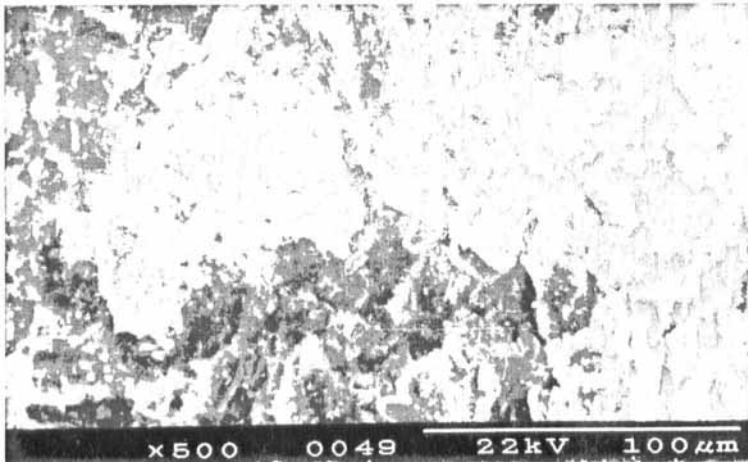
SEM fracture surface (60°C, 500 mm·mm⁻¹) showing regions of brittle failure combined with matrix ductile tearing.
